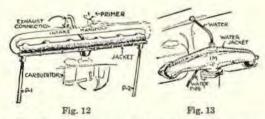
Franklin exhaust method of heating the mixture. Note the jacket which encloses the intake manifold through which exhaust gas passes. A cut-off is provided when the engine becomes very warm. P1 and P2 pipes are left open. See also page 142.
